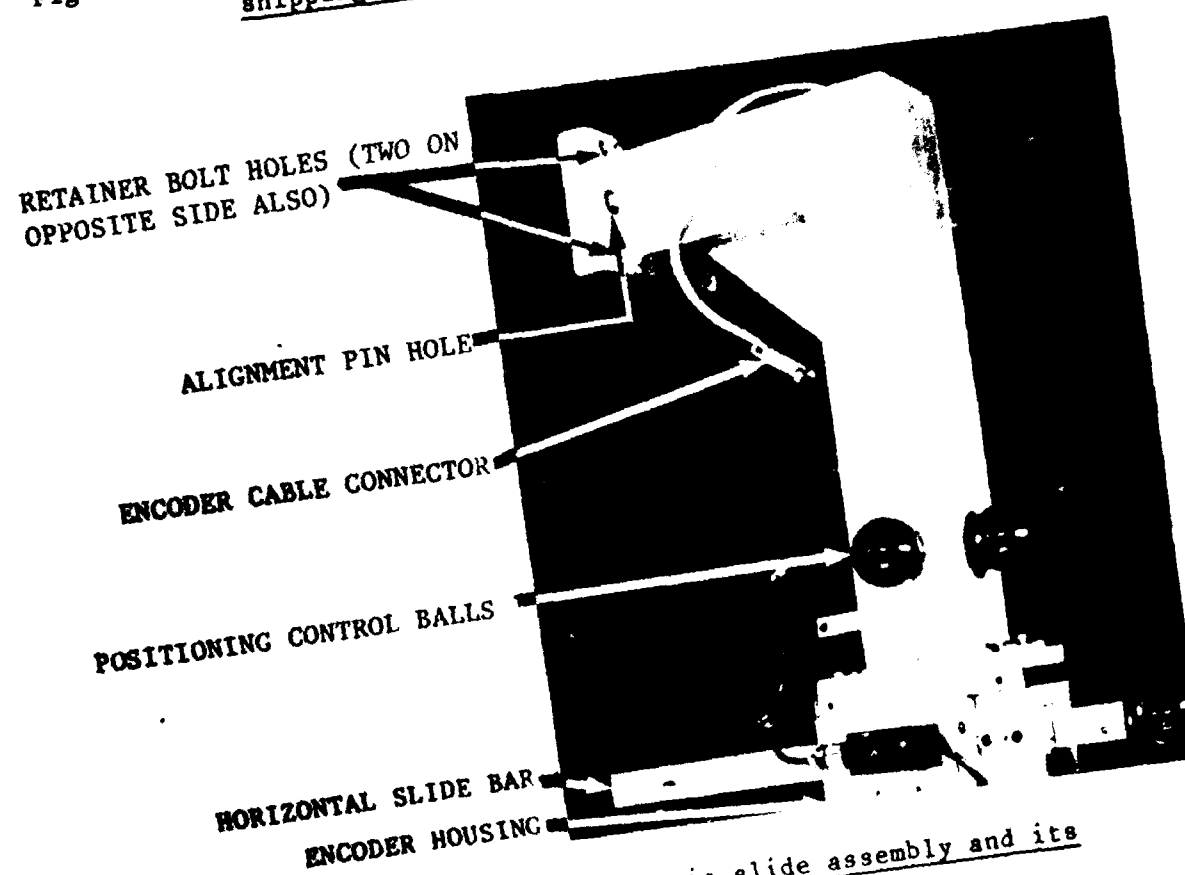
The horizontal axis slide assembly and its mounting arm.
